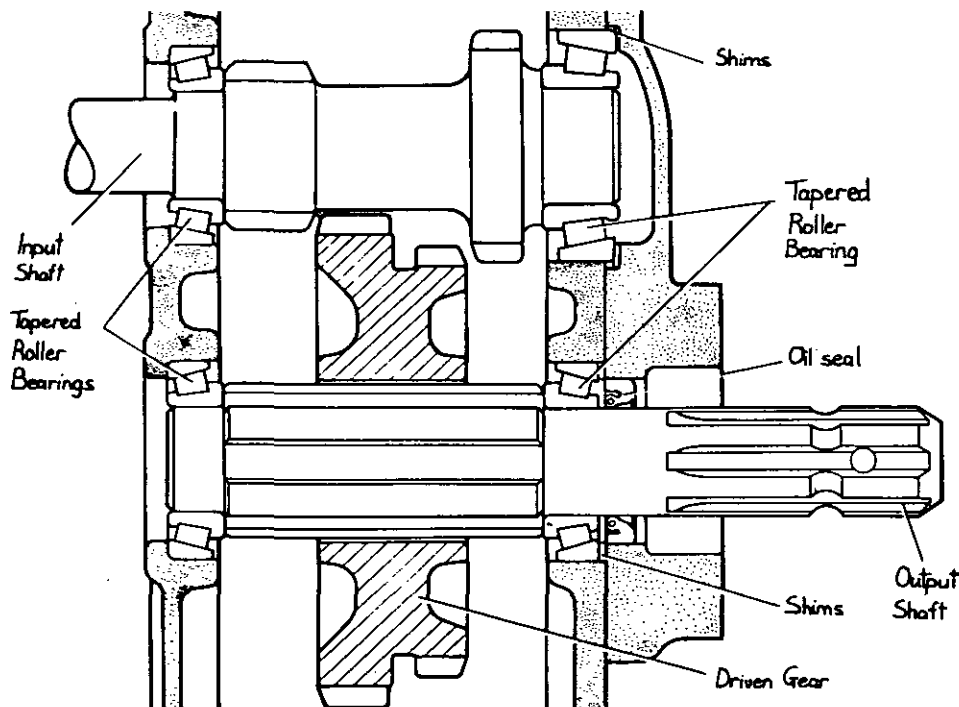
GEARS AND SHAFTS — MULTI-SPEED PTO
